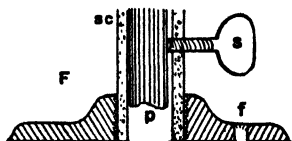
F. SECTIONAL VIEW OF A RAILING FLANGE AND SOCKET.
